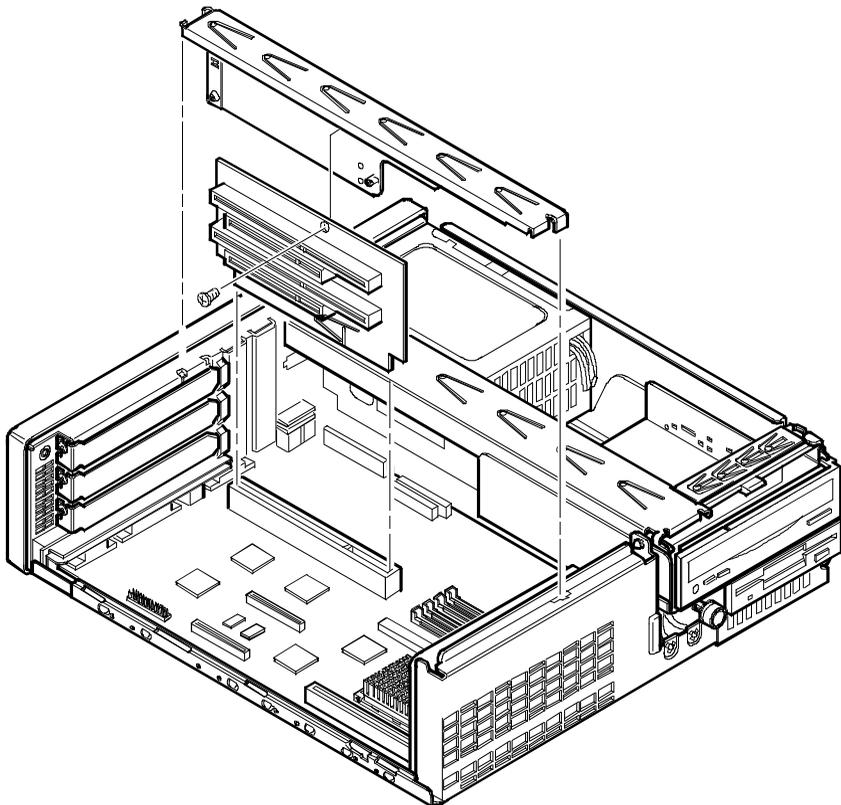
28 Removing the CELEBRIS GL Riser Card & Bracket
